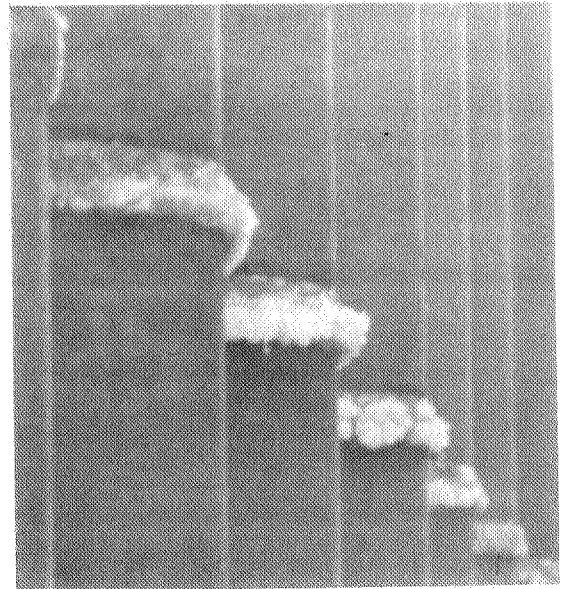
Corrosion deposits around welds in furnace tubes.
